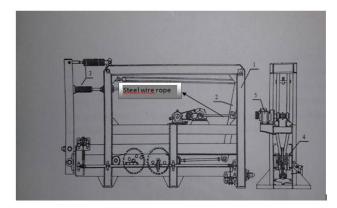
Fatigue machine P5-GIG3 1-Steel frame, 2-arm, 3-springs, 4-wheelchair, 5-drive [Zrnik 2000, Tomkova 2001]
